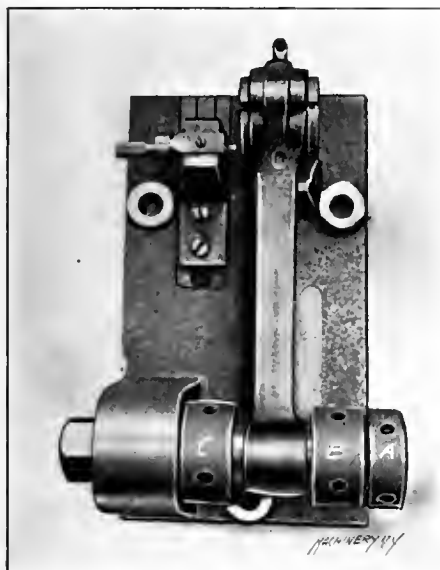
Fixture for Testing the Relative Lateral Positions of Connecting-rod Bearings
